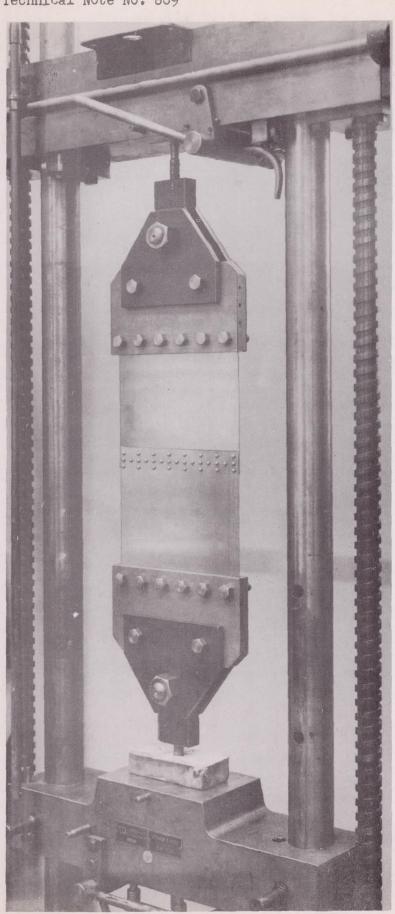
Test of wide riveted joint in 52S-1/2H sheet 0.051 inch thick.
